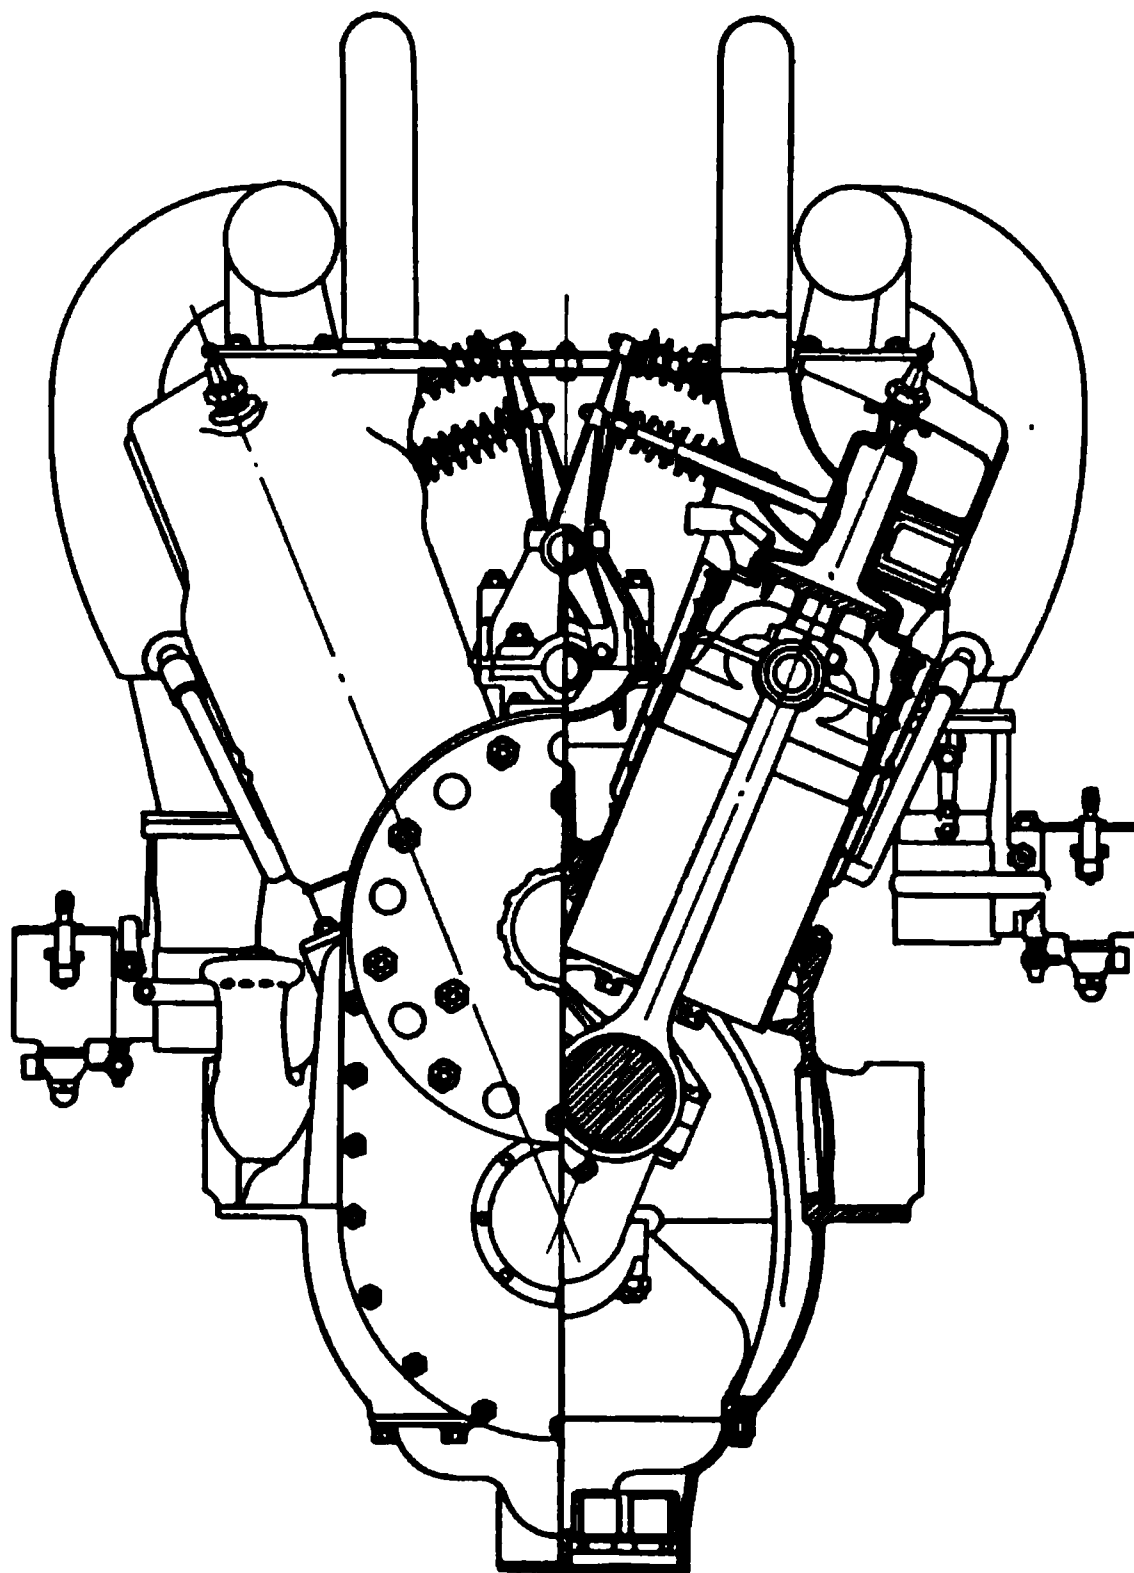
Front and Sectional Views of the Model H Duesenberg Engine.
